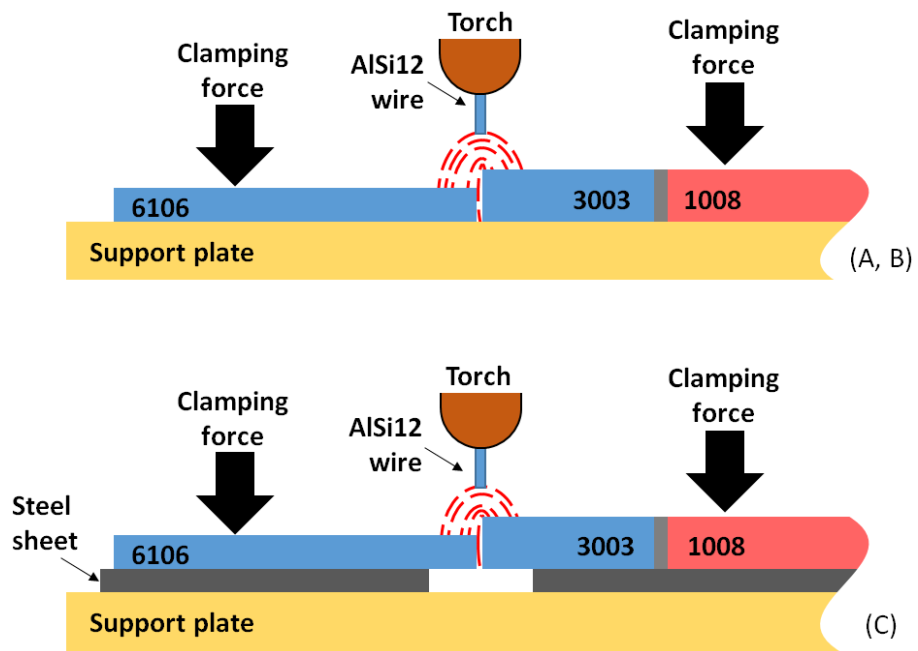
Schematic welding setup for the aluminum side weld of the type A and B (top) and type C (bottom) hybrid joint specimens.
